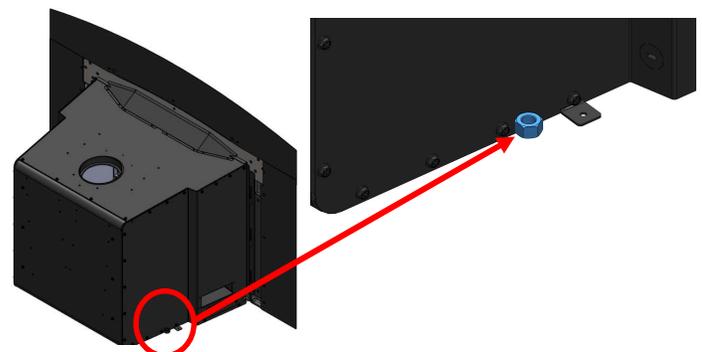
Welded Nut Location for Leg Leveling Bolts
